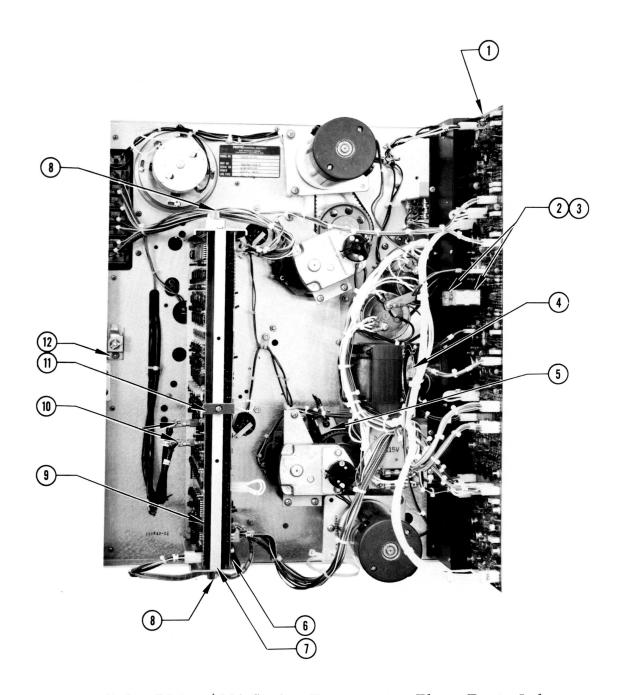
75 ips 6000 Series Transports, Photo Parts Index
